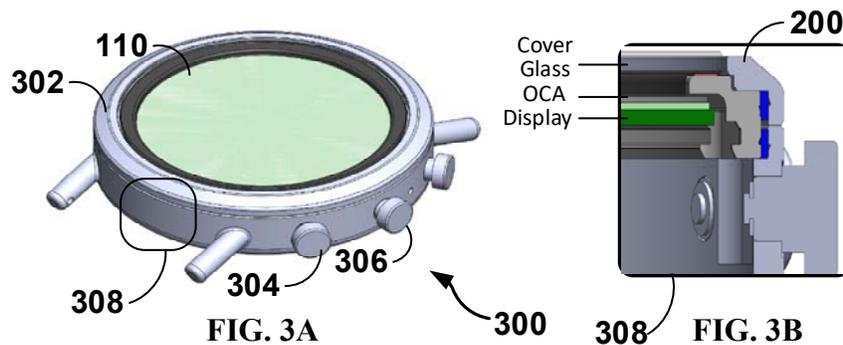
A illustrates manufactured wearable device 300 with cosmetic case 302 coupled to glass chassis 108 of lamination assembly 200. To assemble manufactured wearable device 300, glass chassis 108 of lamination assembly 200 mechanically integrates cosmetic components with other non-cosmetic utilitarian components. To provide cosmetic variation in the design of manufactured wearable device 300, display 110 and lamination assembly 200 form modular display platform 100 into which any number of cosmetic components may be integrated.
